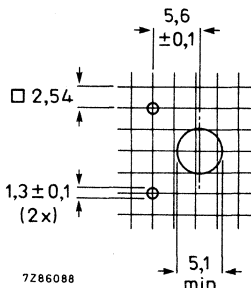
Hole pattern for mounting on a printed-wiring board.
